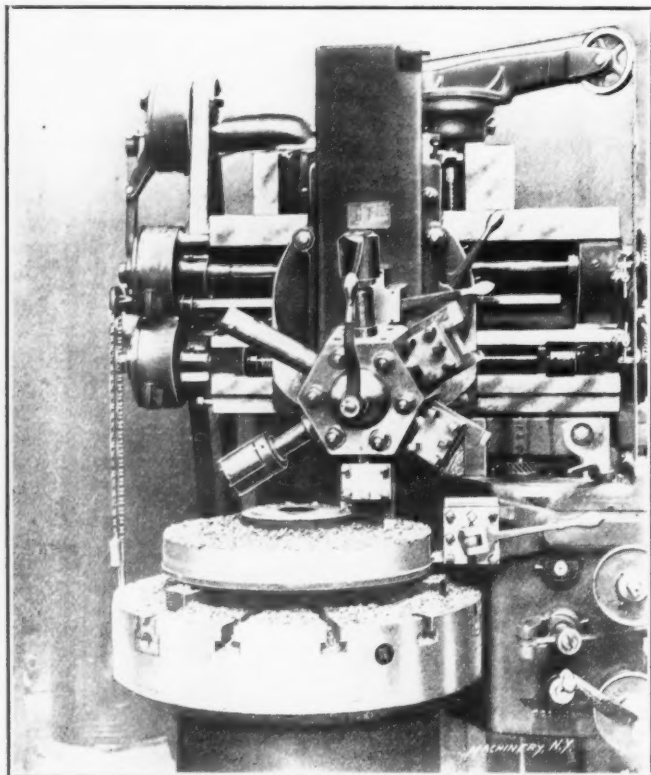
Machine in Operation, Finishing Gear Blanks.
